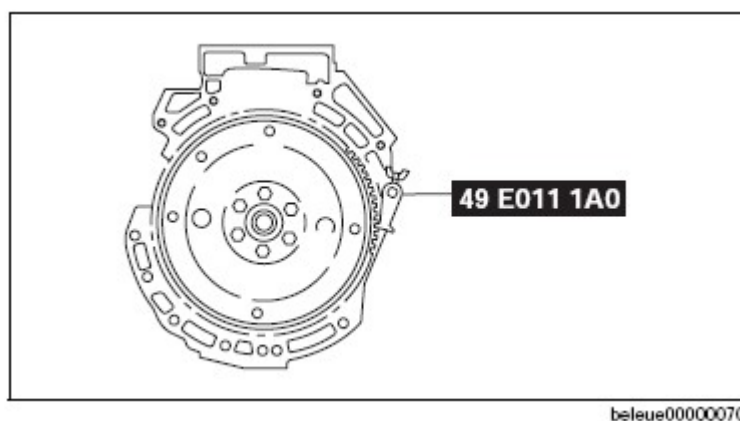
Identifying SST On Ring Gear To Lock Crankshaft Against Rotation
